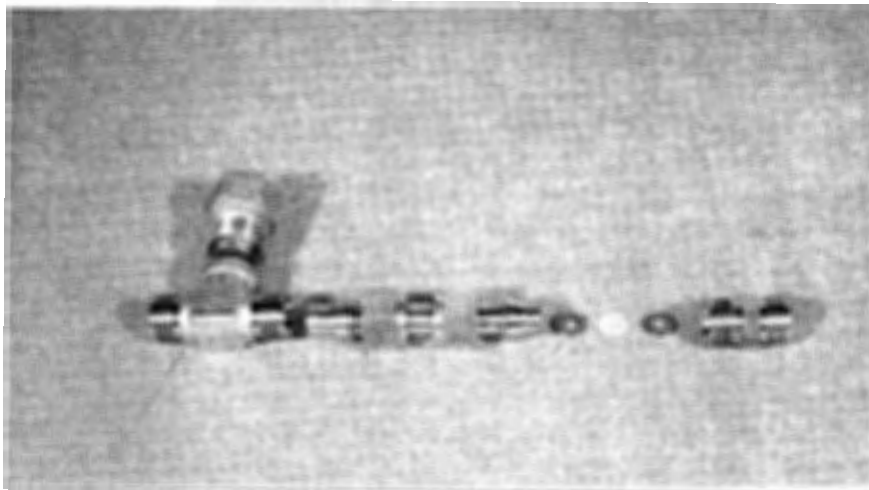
ASSEMBLY OF PRESSURE TRANSDUCER
